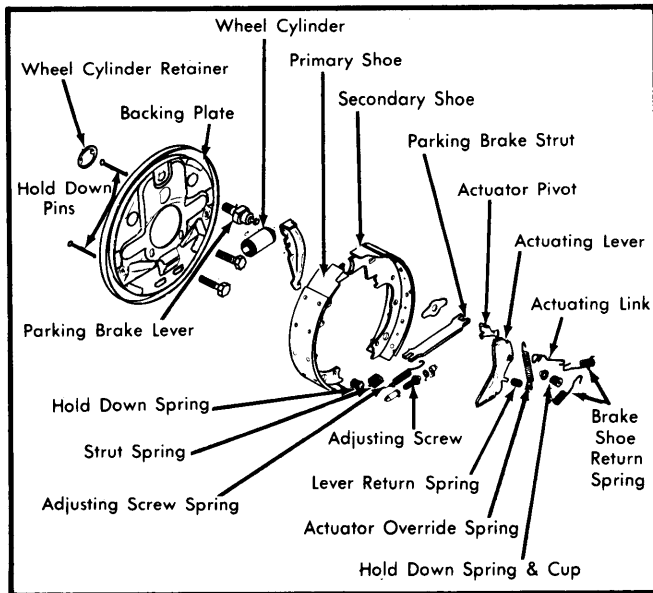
Exploded View of Rear Drum Brake Assembly (Century, Cutlass, El Camino, Grand Prix, LeMans, Malibu & Monte Carlo)
